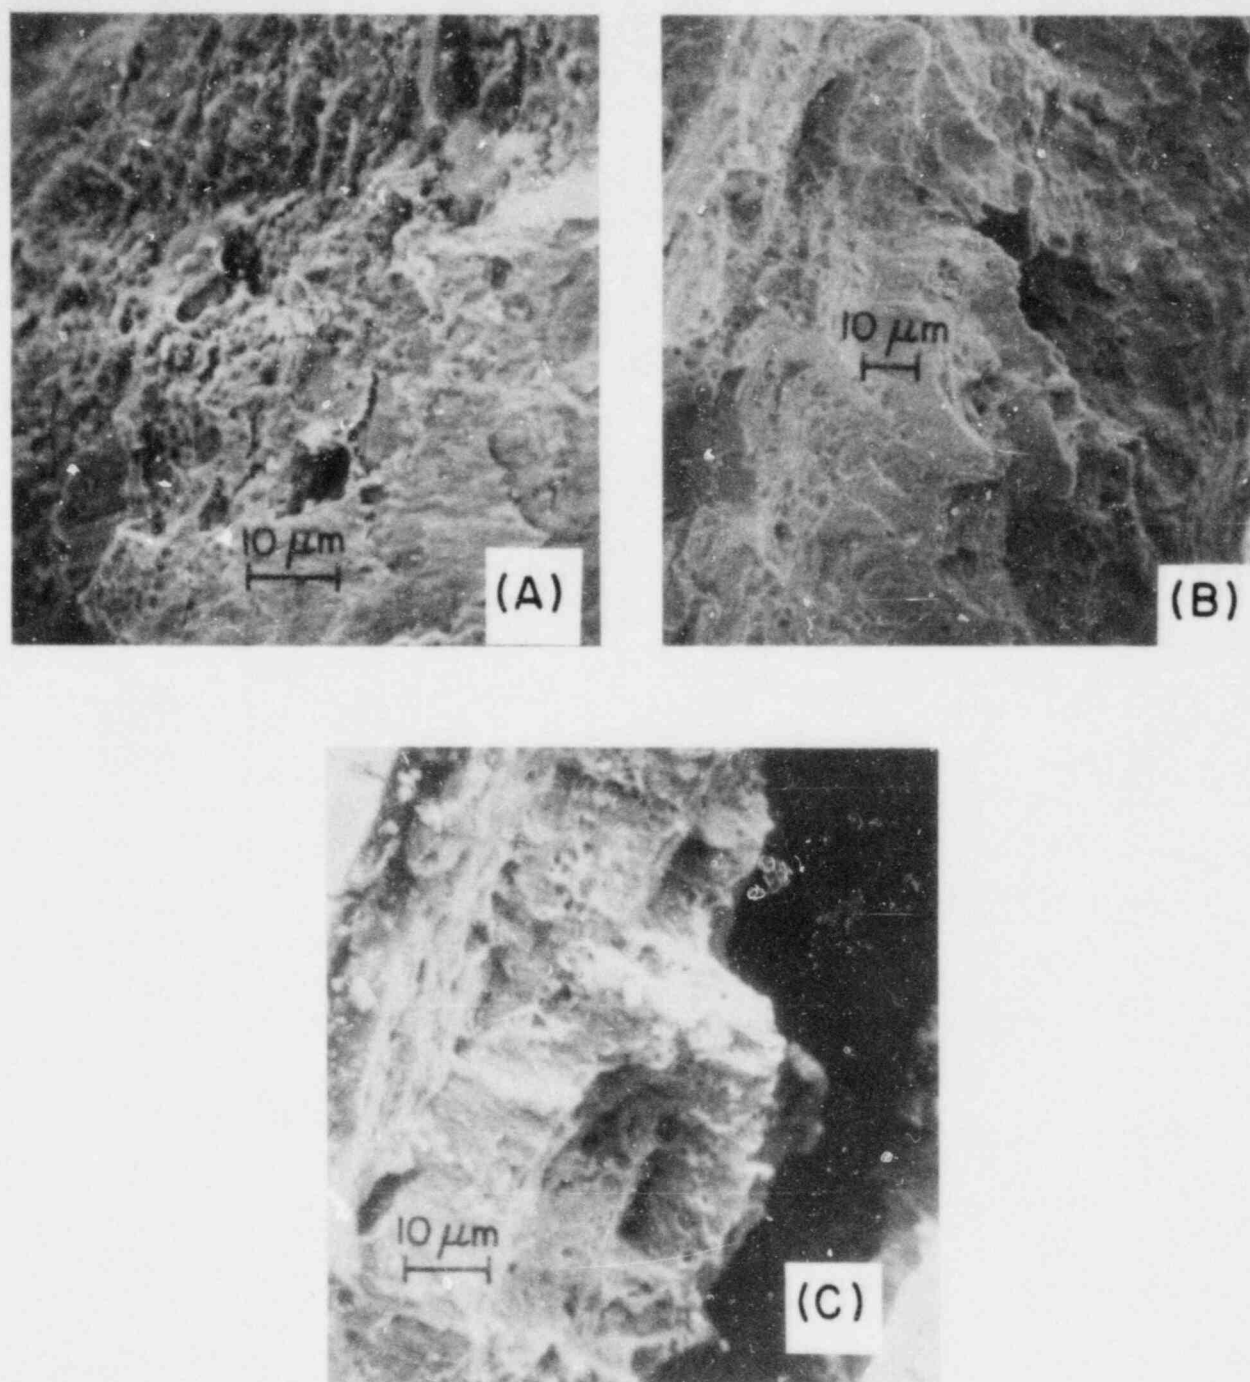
Fracture Surface Morphologies of the 217B2D Specimen. (A) Near the inner surface; (B) middle of cladding wall; (C) near the outer surface. The specimen failed in a ductile manner.
